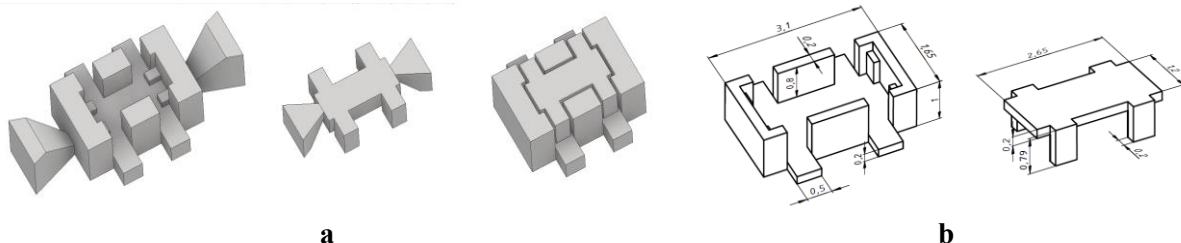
Typical 3D model using for laser micromilling (a) and sketch of SMD package in form-factor SC59 with dimension given in mm (b).
